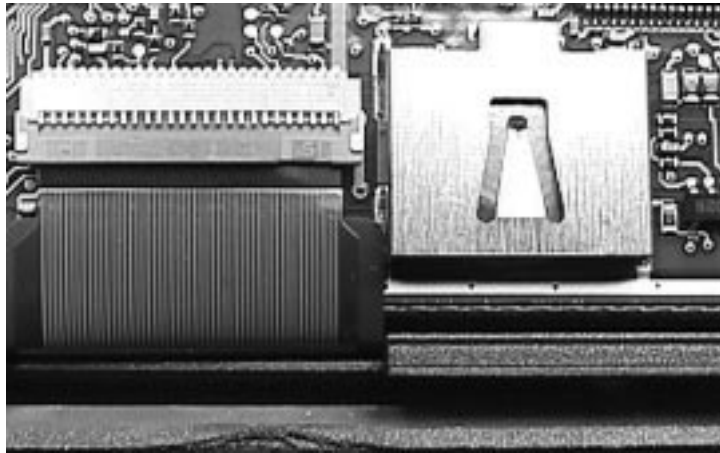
Correct way to assemble coaxial cable under hinge flex cover.
